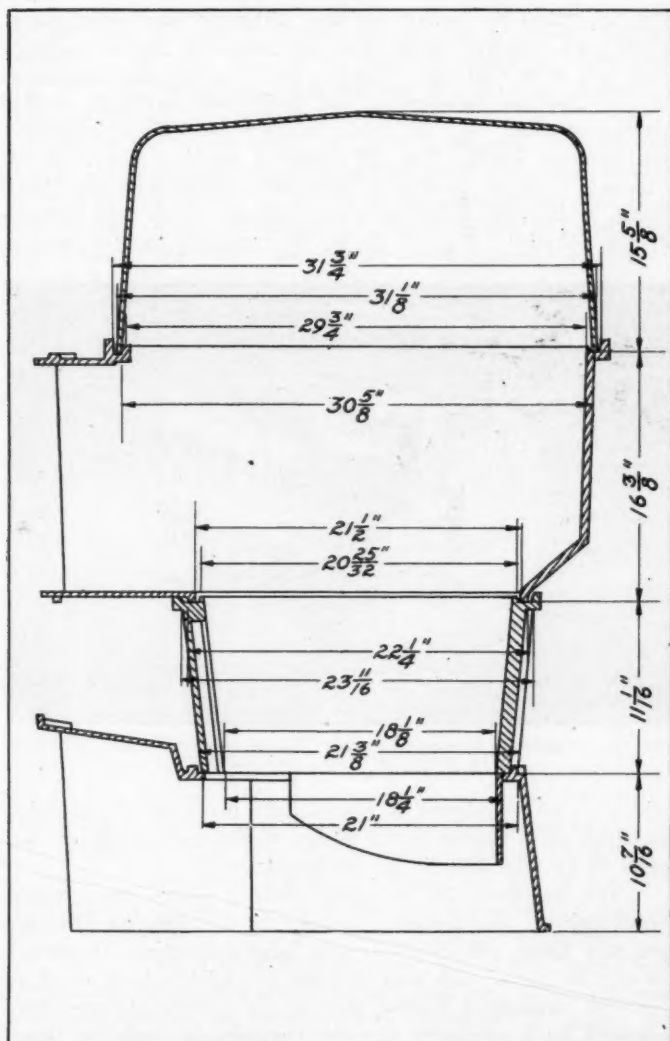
DESIGN FOR HOUSE FURNACE—CASTINGS MADE ON MOLDING MACHINES
